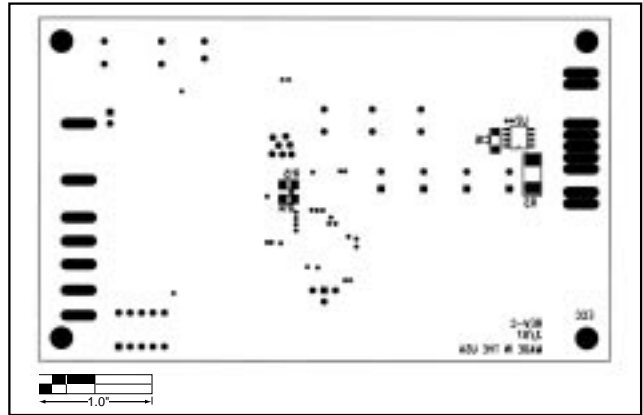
MAX1624 EV Kit Component Placement Guide—Solder Side
